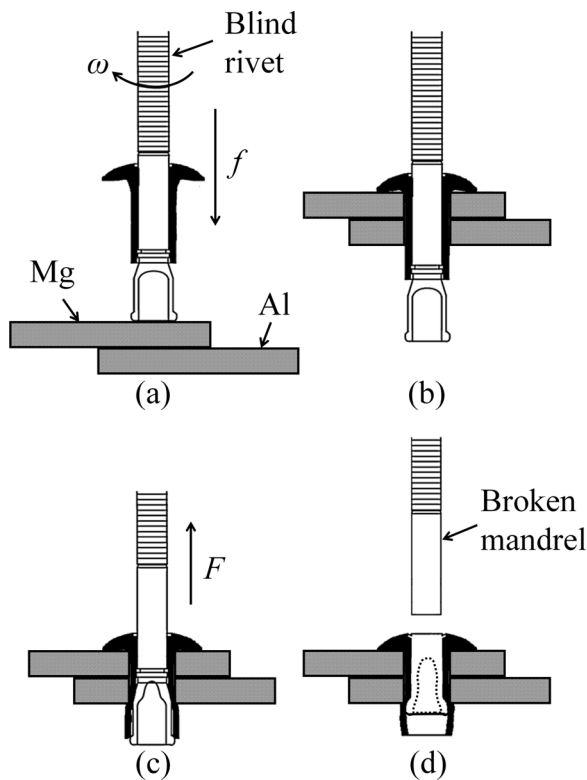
Illustration of the FSBR process [7]: (a) rotating blind rivet approaching the workpieces; (b) frictional penetration of the rivet; (c) pulling out the mandrel; and (d) completion.
